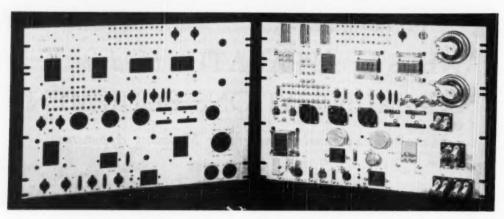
FLAT PANEL HAVING A NUMBER OF ROWS OF APPARATUS MOUNTED ON BOTH SIDES
